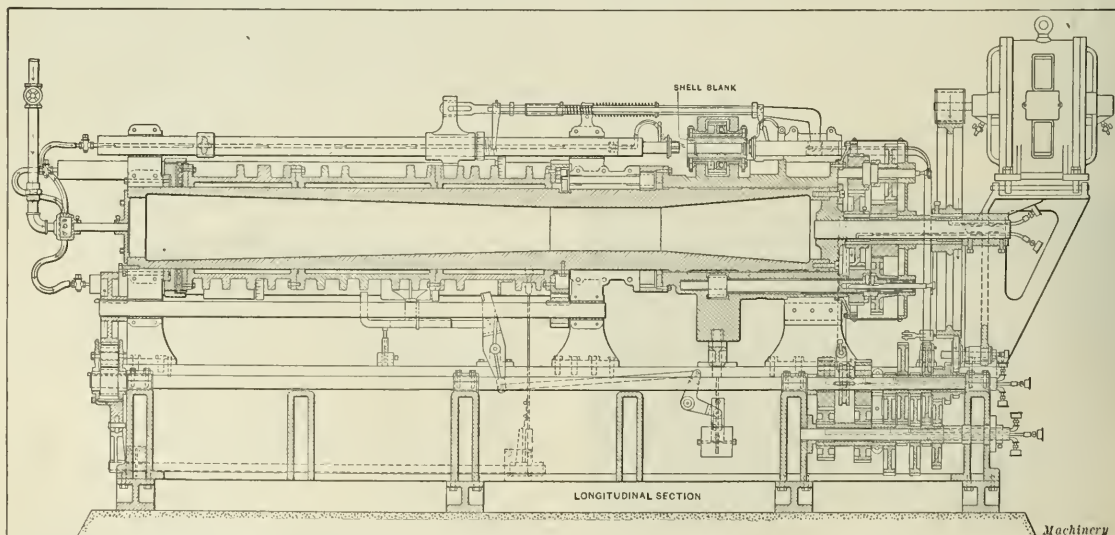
Longitudinal Section of Machine shown in Fig. 1, illustrating Method of driving, etc.
